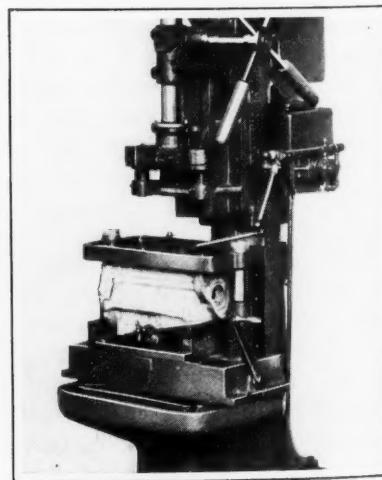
Equipment Employed for Drilling and Reaming Locating Holes in the Crankcase
